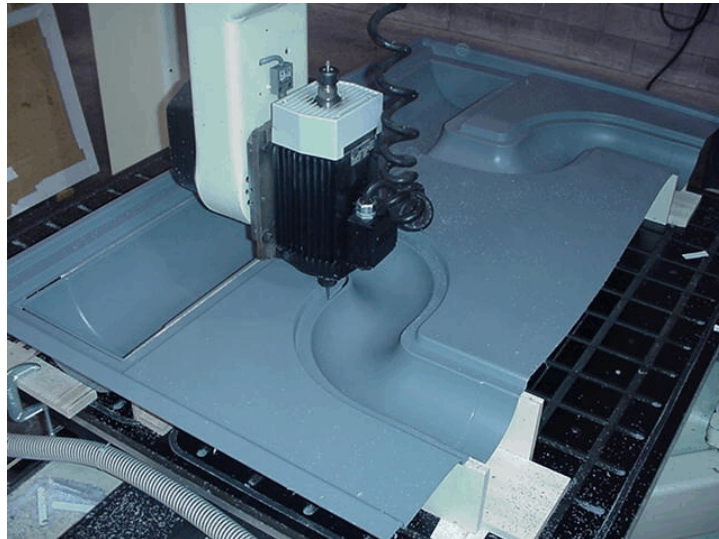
A CNC machining the excess sheet material from the trunk half. At production scales the trimmed excess is readily recycled.
